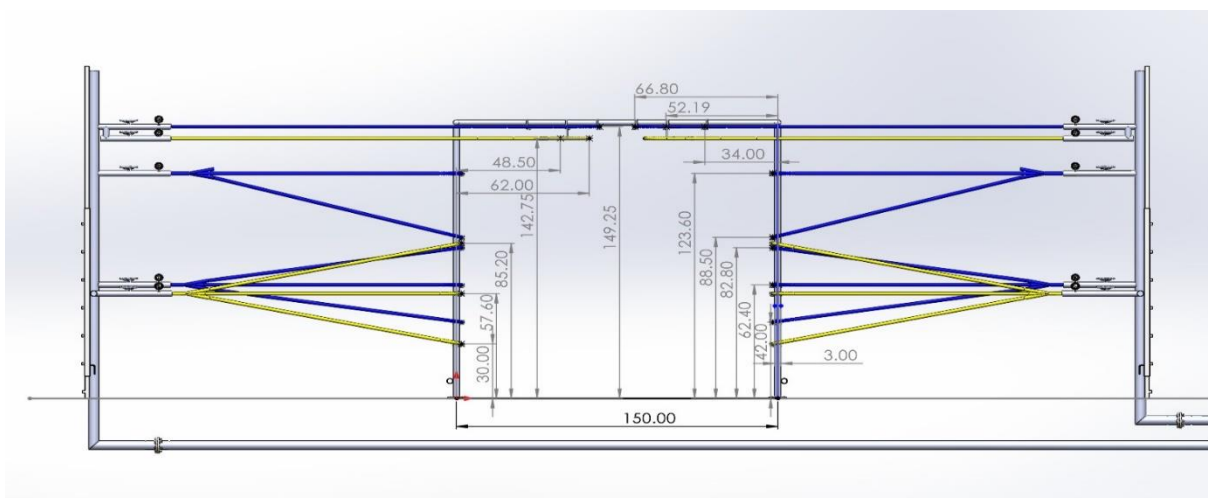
Front view of New shower tester with detail dimensions (inch)
